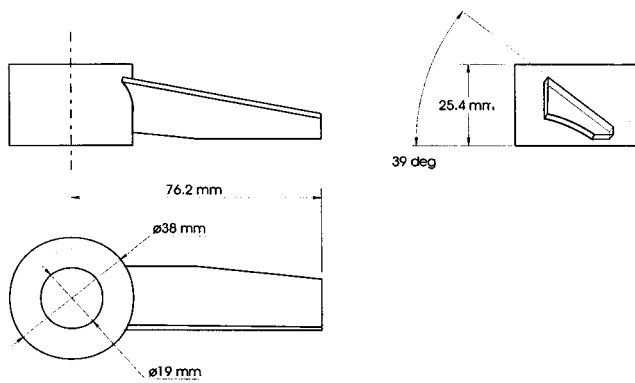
Impeller configuration- one of three equally spaced blades shown
